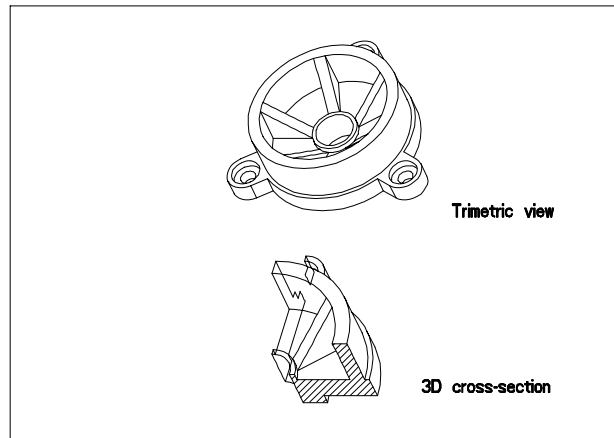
The trimetric view and the 3D cross-section in the A4 drawing sheet
